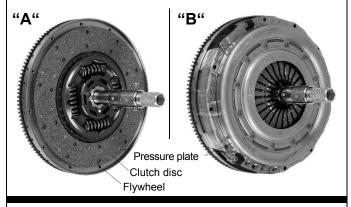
Centring the clutch disc/Mounting the pressure plate
